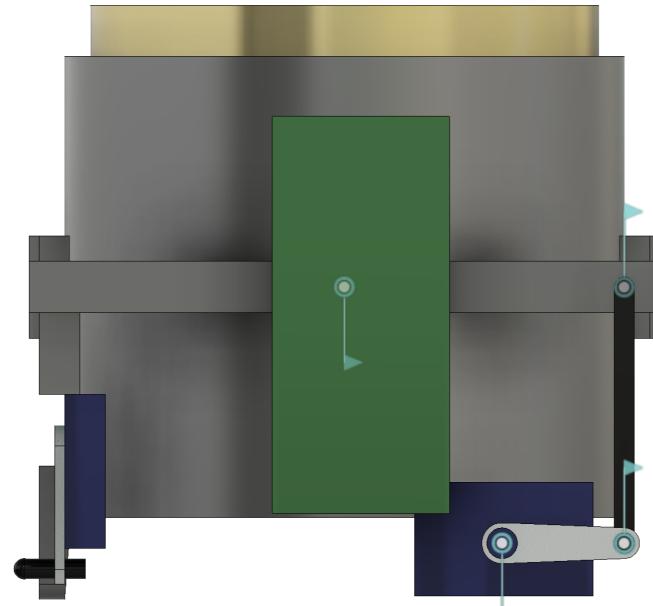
Side view of the thrust vectoring mechanism (Version 1)
